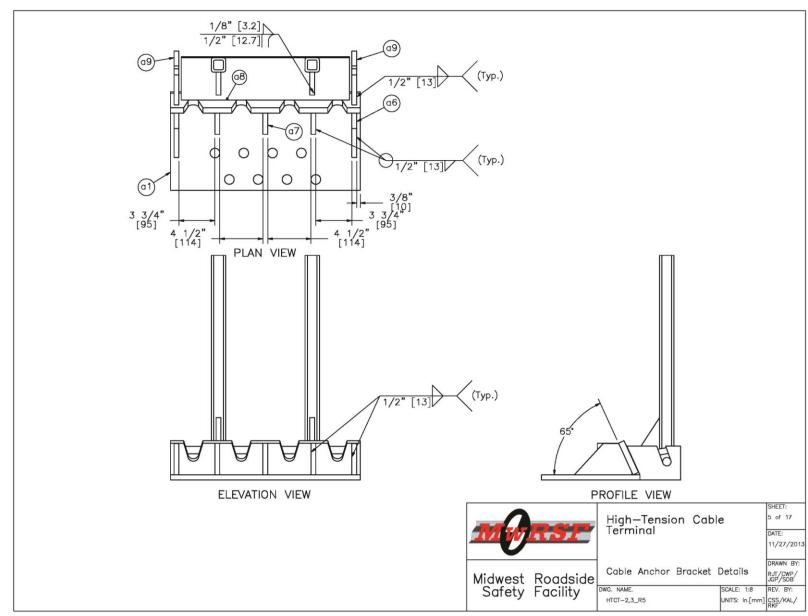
Cable Anchor Bracket Details, Test Nos. HTCT-2 and HTCT-3
